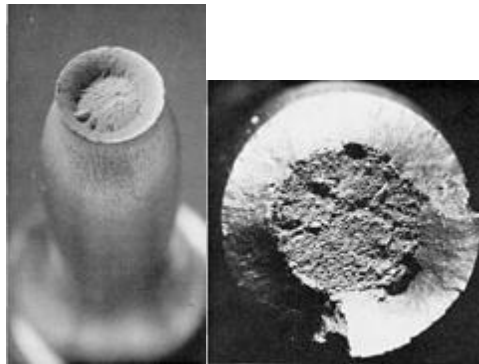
The classic cup-and-cone tensile fracture type. [21].
